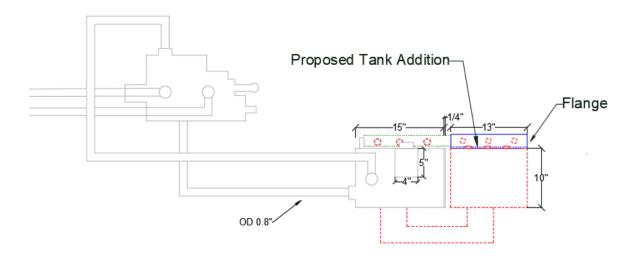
CAD drawing of proposed hydraulic reservoir via addition of a 10" x 13" x 6" tank and u-shaped connection to the existing tank. A flange is added on top to support the weight of the new tank.
